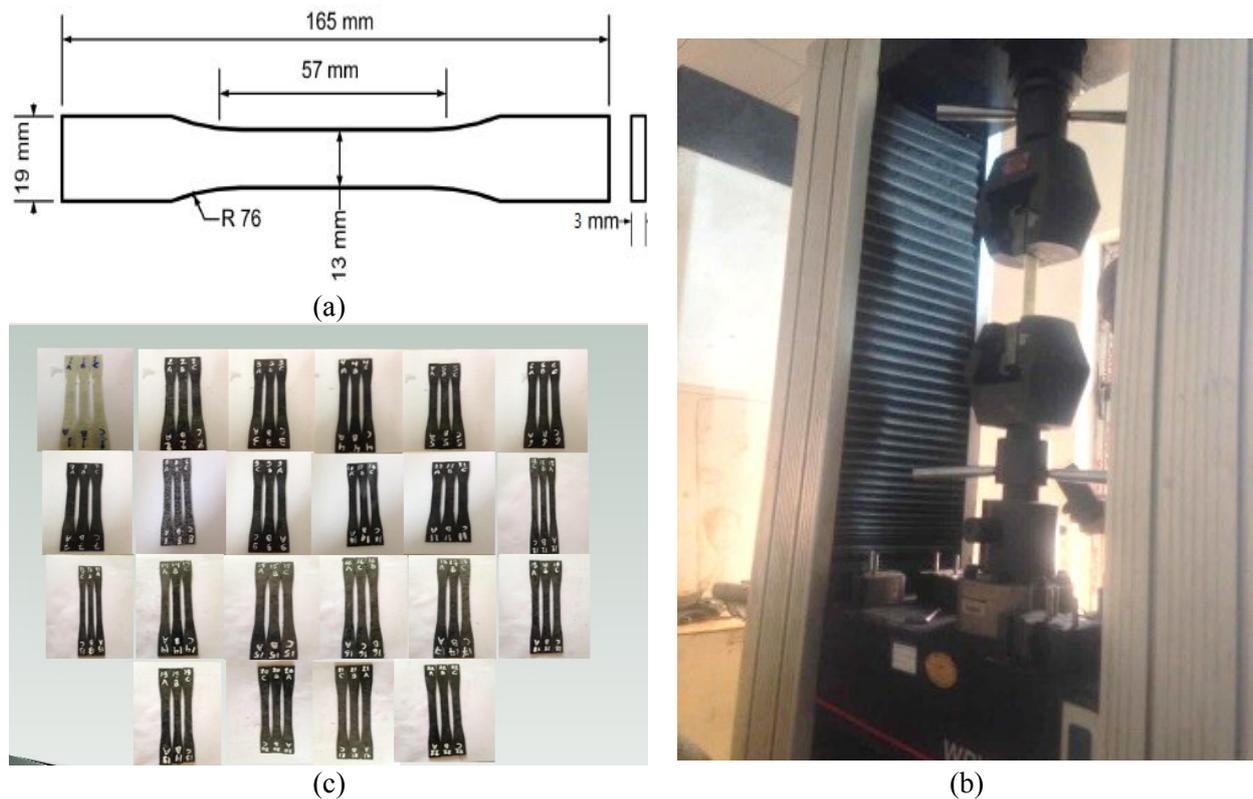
(a) Dimensions of tensile test specimen, (b) tensile test machine, (c) manufactured specimens.
